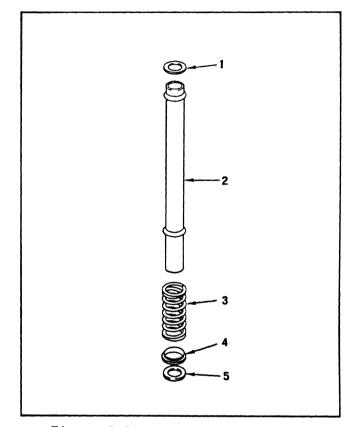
Pushrod Cover Tube, Assembly/Disassembly
